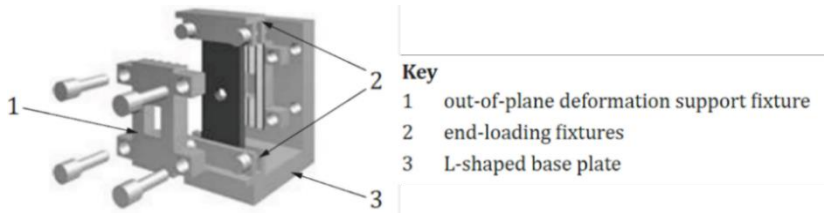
End-loading test fixture recommended in ISO 12817 [85]
